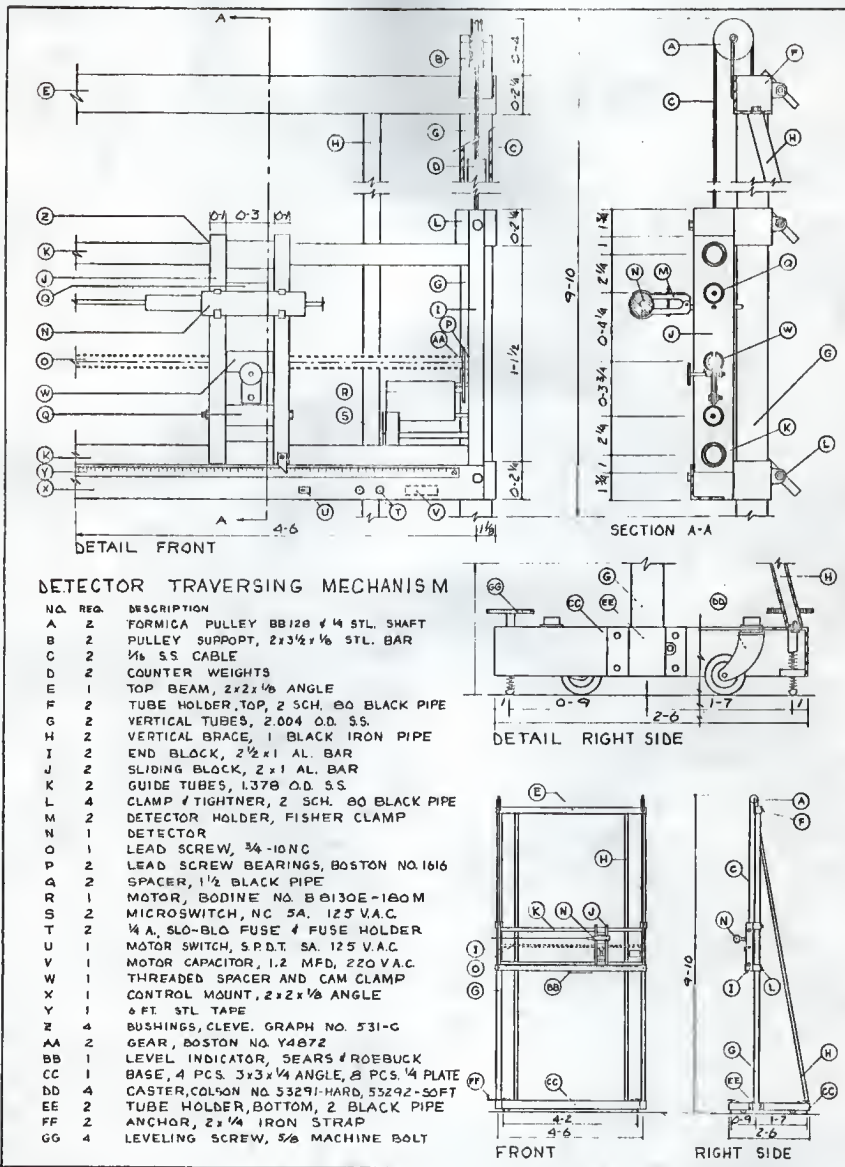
Traversing mechanism for graphite pile, assembly drawing.
